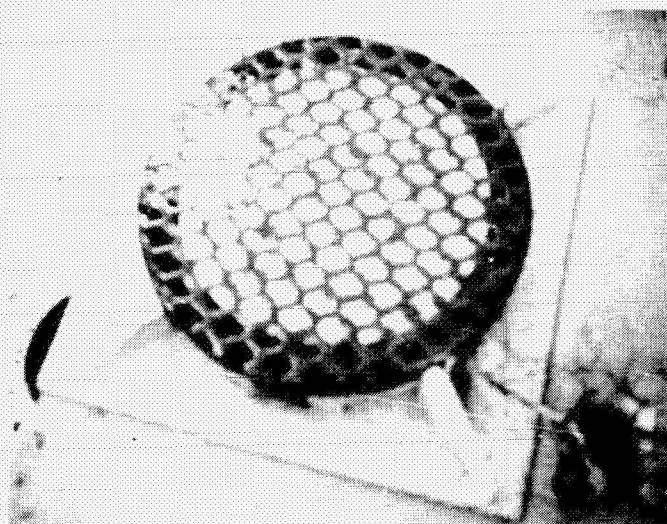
Adhesive Applied to Calorimeter Heater Assembly
